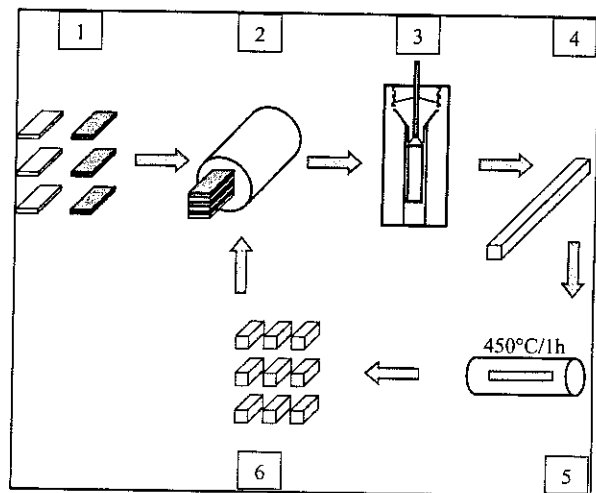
Extrusion cycle: (1) cutting and stacking of starting foils; (2) inserting into the Al billet; (3) Extrusion; (4) Taking off Al billet by chemical attack with NaOH; (5) Annealing at 450°C/1h; (6) Cutting and reassembling for next extrusion cycle.
